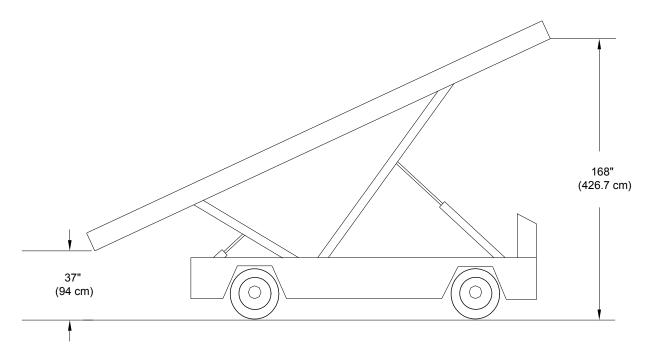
Figure Operation - 3 - 7: Conveyor - Full Up Rear, Full Up Front
